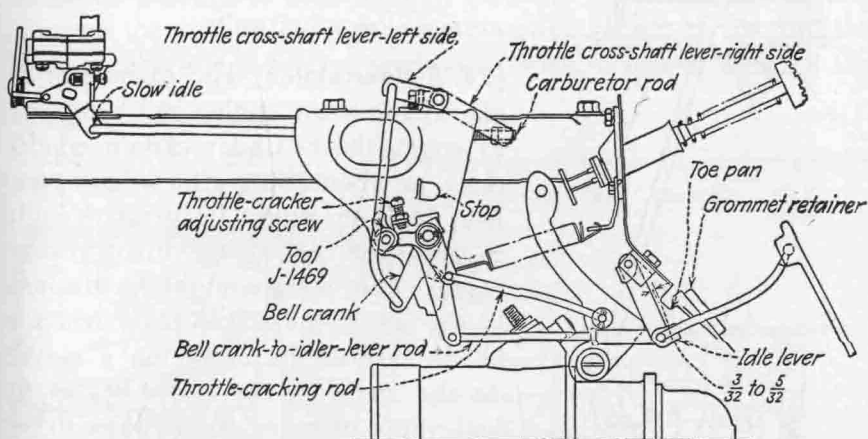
Linkage connecting cranking-motor-switch lever and accelerator so that throttle is cracked during cranking. On solenoid-actuated cranking-motor-control systems, there is a linkage to the solenoid to perform the same function.
